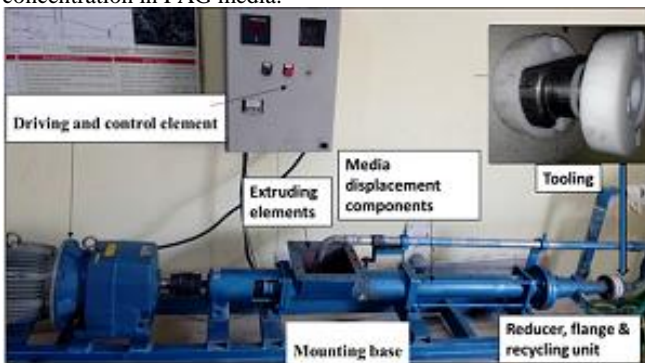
Photograph of UAFM setup with tooling holding the glass mold
